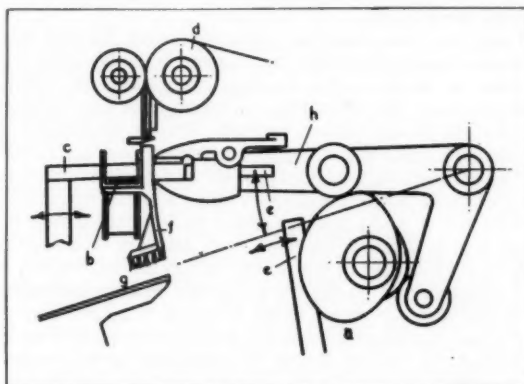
Oscillating holder type of machine which utilizes positive cam drive for the stationary positions. a, driving cam; b, feed belt; c, pusher; d, wrapper feed; e, ejector; f, folder; g, discharge channel; h, article holder
